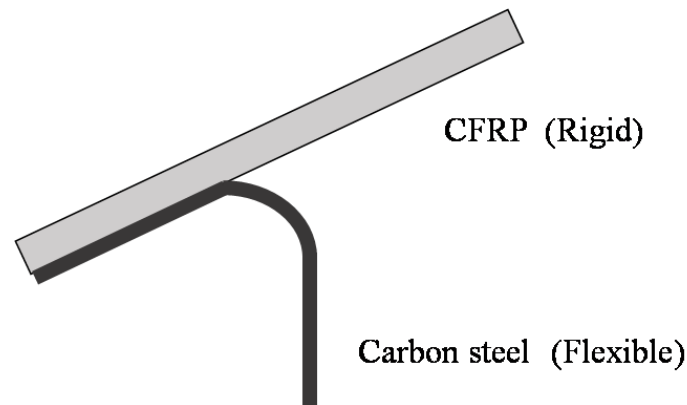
Floating roller peel test specimen CFRP-Carbon steel
